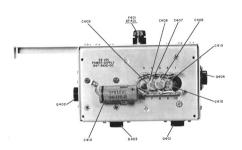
28-Volt DC Power Supply, Bottom View, Parts Location
